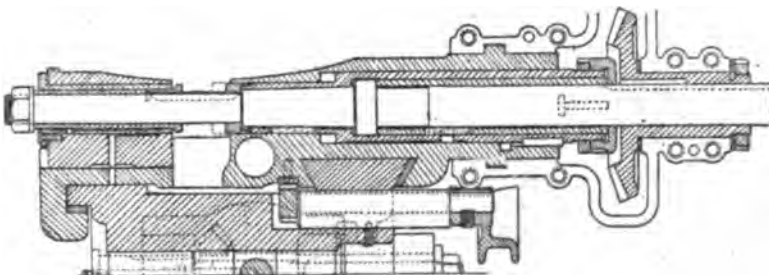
Section through Cutter Spindle, showing Method of Adjustment.
